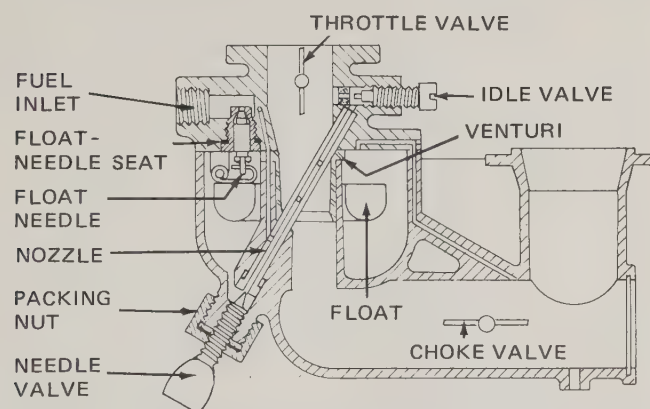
Sectional view of a carburetor for a small engine. (Briggs & Stratton Corporation)
